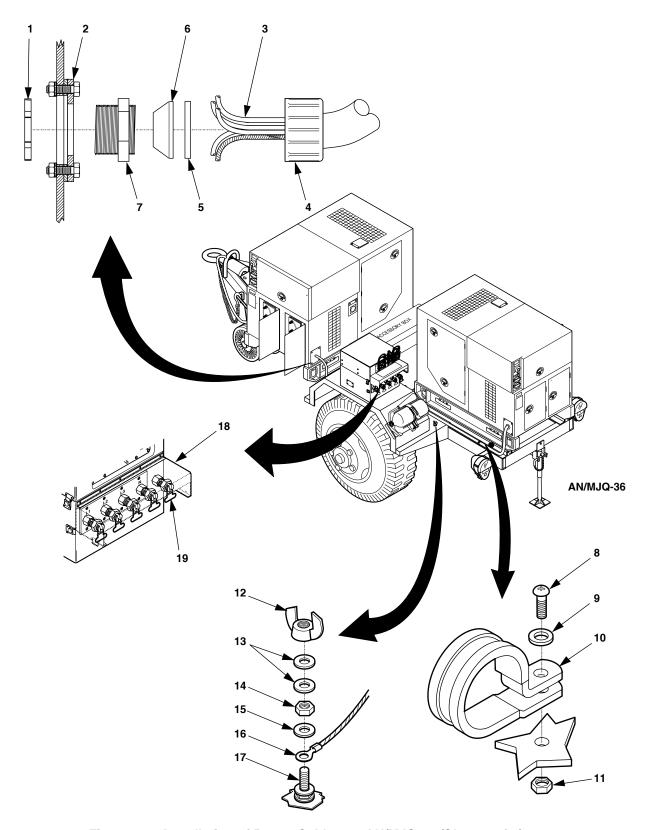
Installation of Power Cables on AN/MJQ-36 (Sheet 2 of 3).
